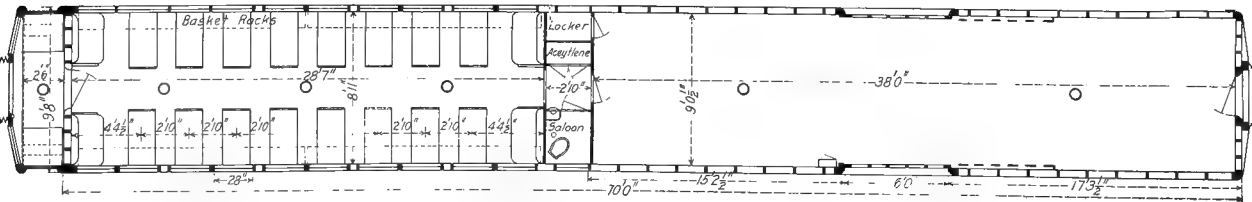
Floor Plan of Chicago, Burlington & Quincy Combination Baggage and Passenger Car. Builder, American Car & Foundry Company.
